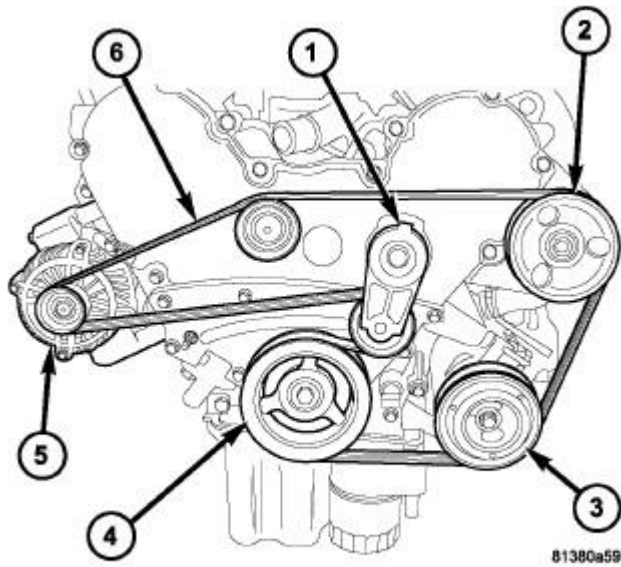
ACCESSORY DRIVE BELT ROUTING
